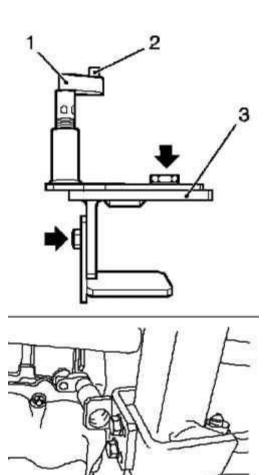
Installation support the front axle: 1 - prop, 2 - neck, 3 - a special device
